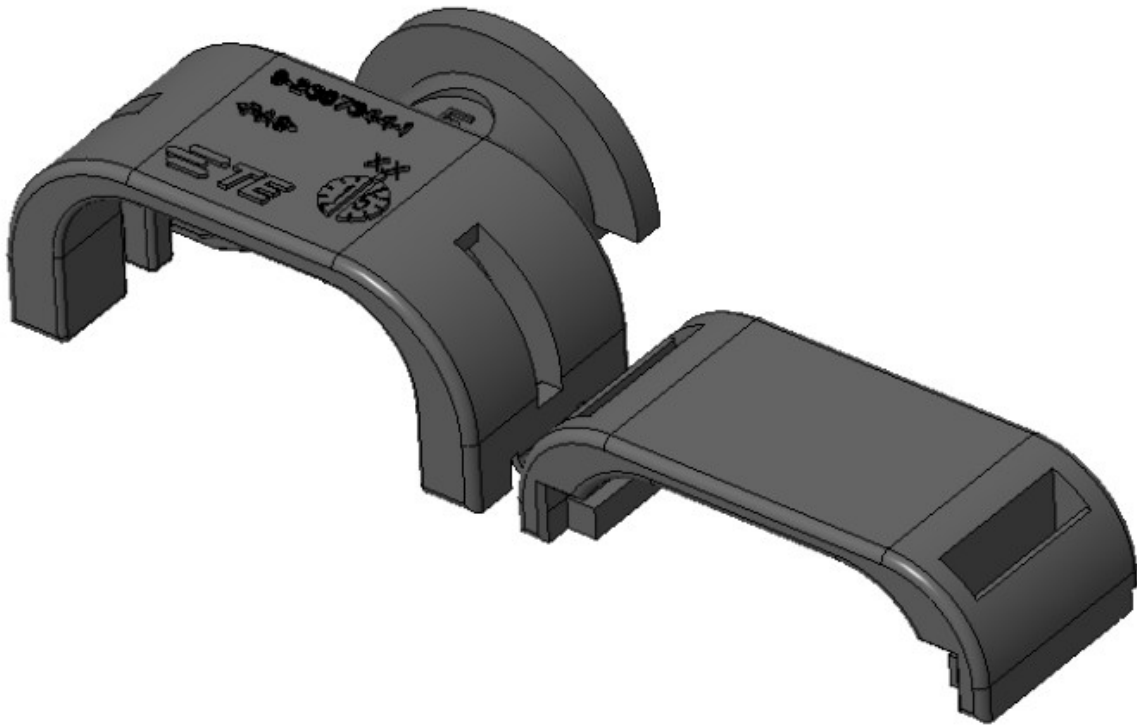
f: DT Highspeed Pin and 2 port Bulkhead Pin Assembly Seal Cover
